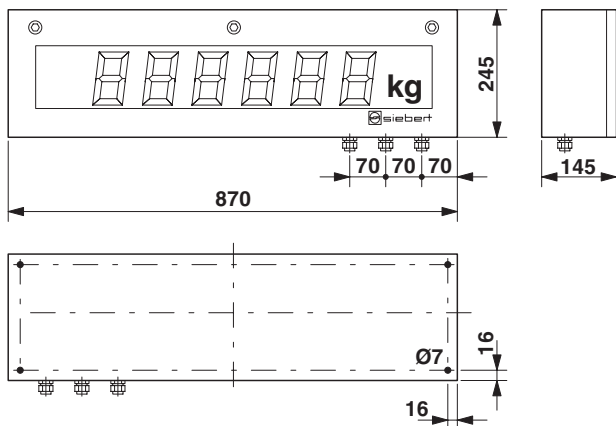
Dimensions of display S302 ... (dimensions in mm)
